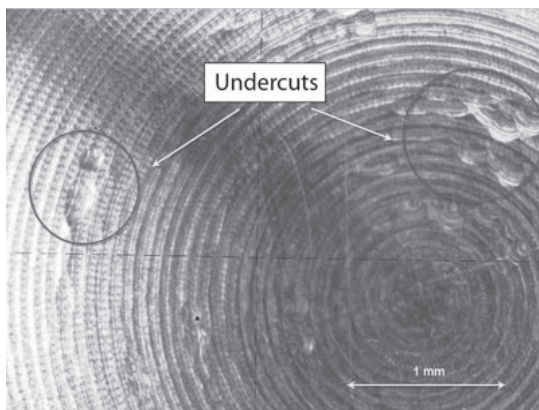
Finished part after toolpath1 (enlarged 30-times)
